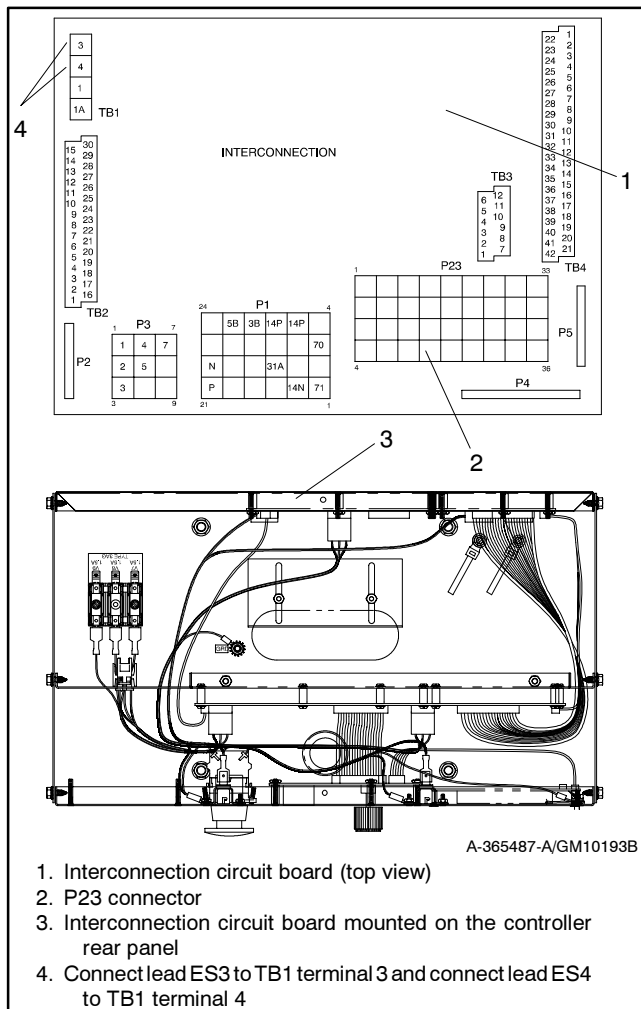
Attaching Wiring Connection Harness to Controller Circuit Board
